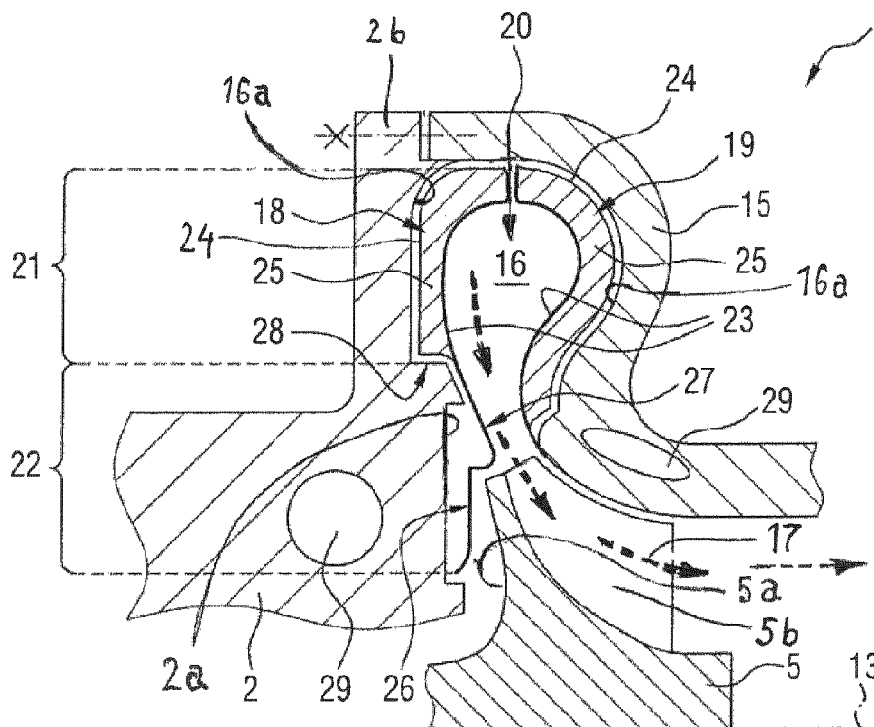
is a cross-sectional view of a mechanical assembly. The assembly includes a main body (1) with a central cavity (16) and a side passage (17). A piston (2) is located in the side passage, with a seal (2a) and a spring (2b) shown. A valve (24) is positioned at the entrance of the side passage. The assembly is shown in a cross-section with various components labeled with numbers and letters.
